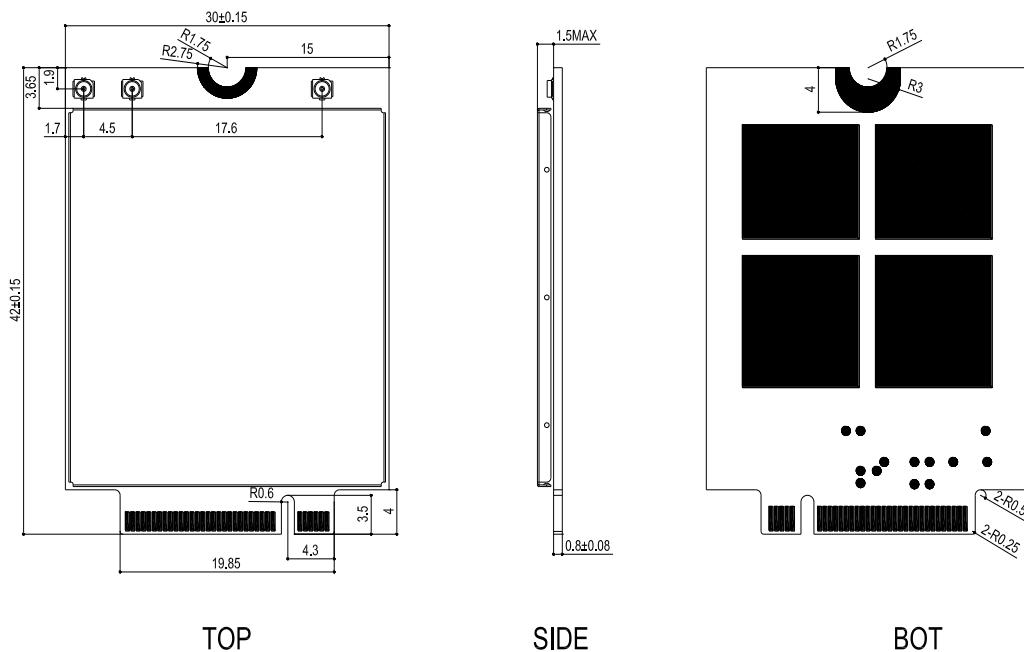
Mechanical Dimensions of the Module (Unit: mm)
